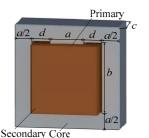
Transformer (tube type) dimensions with primary and secondary windings.
